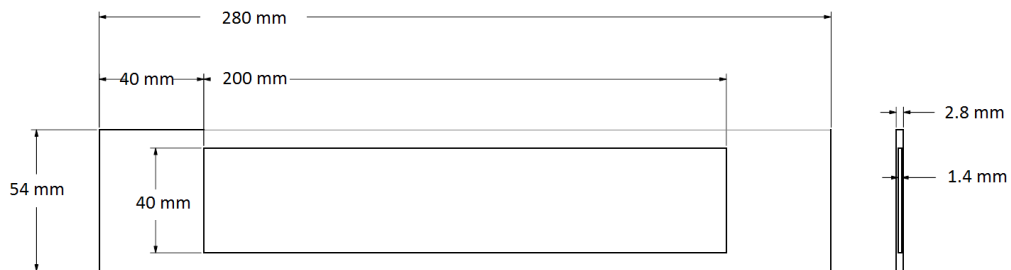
Fuel plate dimensions. Please note that the presented drawing is scaled for illustration purposes.
